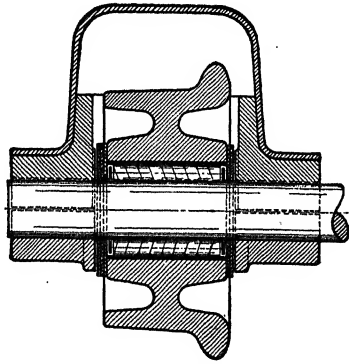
Roller bearing of the spiral type with heavy rigid bearing construction.
